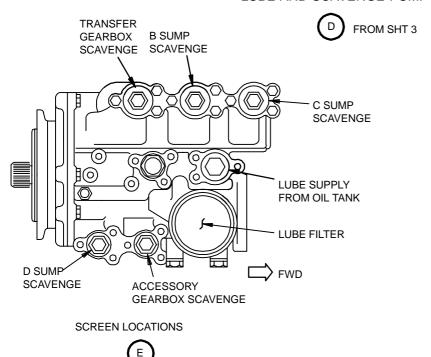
79-00 Oil Component Location Fig. 102 (Sheet 2)
